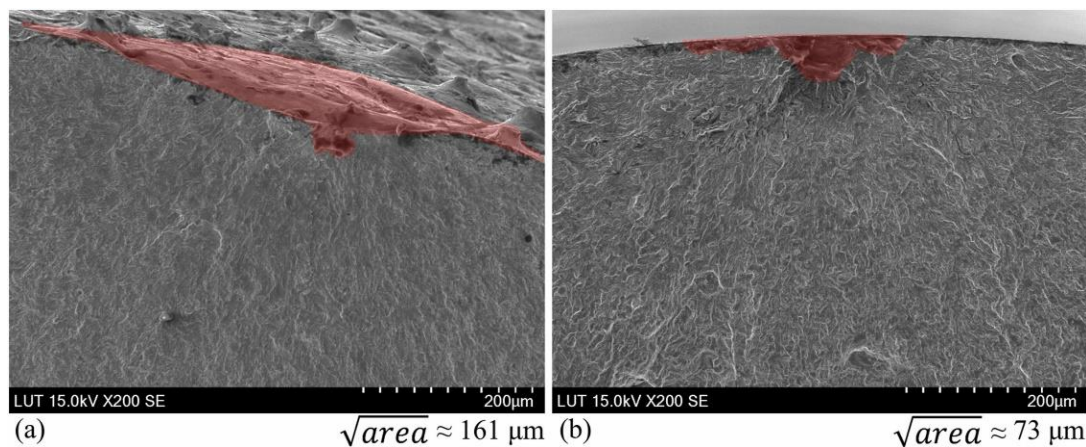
Critical defects caused the fatigue fracture of samples that are (a) vertically built with an as-built surface and (b) vertically built with a machined surface [3].
